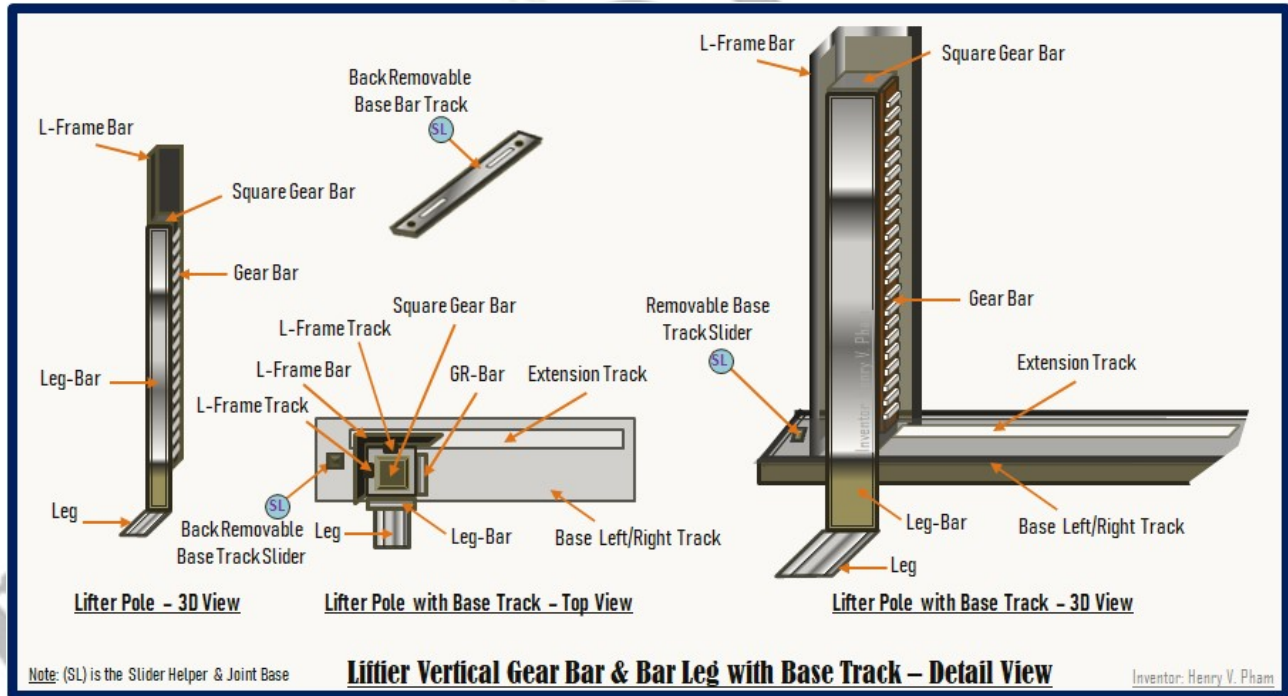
Q-Lifter & Carrier Base Tracks, Gear Bars and L-Frame Pole Detail View
